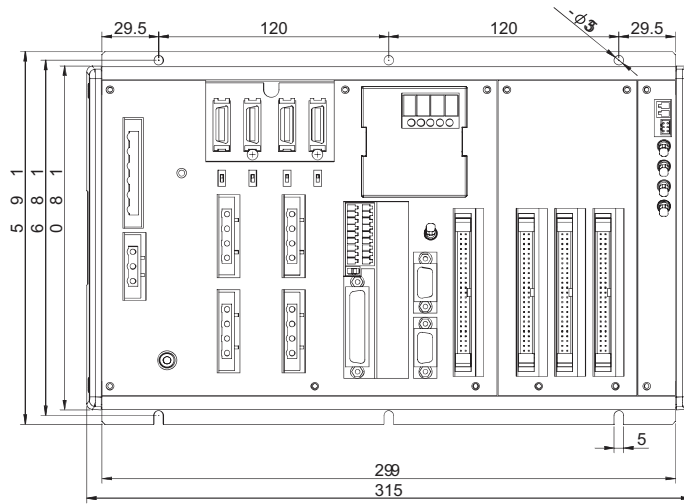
Q/QCT Type 4-axis Controller with Expansion I/O Board + Absolute Brake Unit
